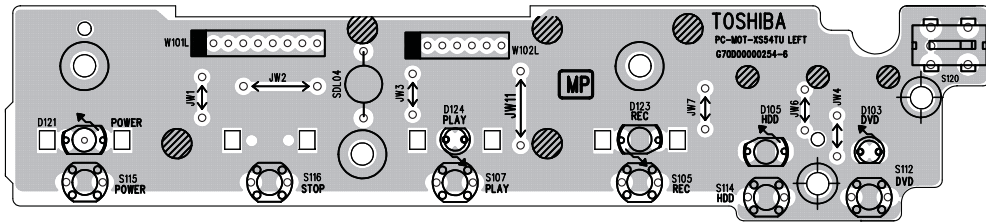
EU03B Front (L) PC Board (Top side)
